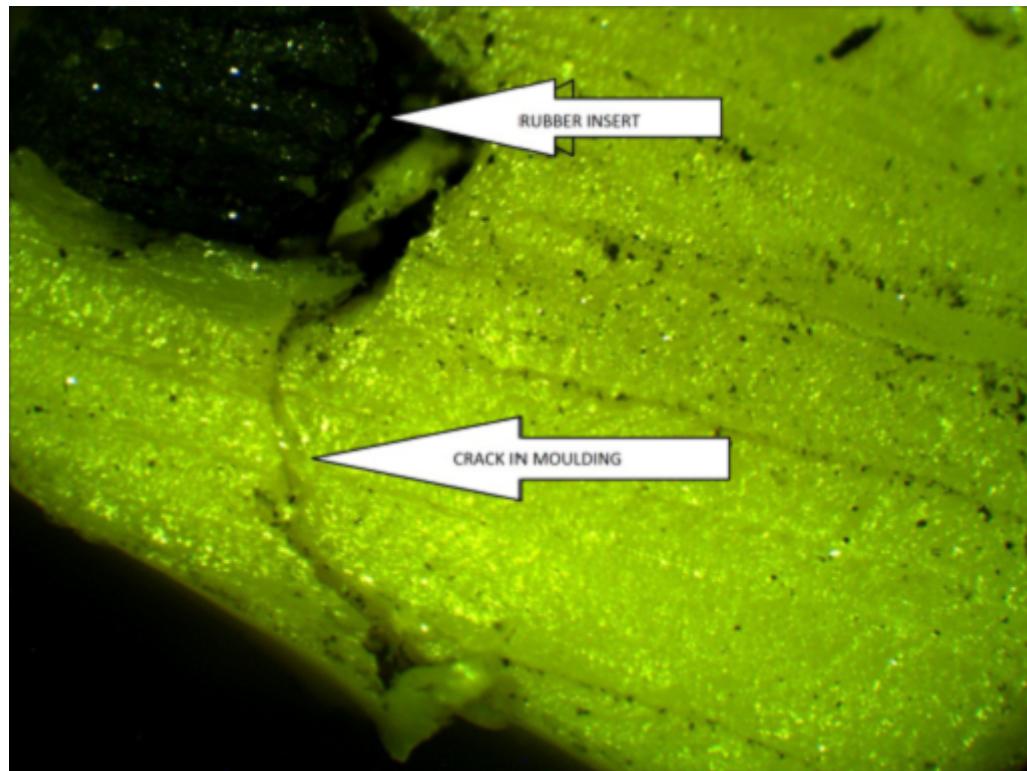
Cracking position in side wall (originating at groove for rubber insert)
